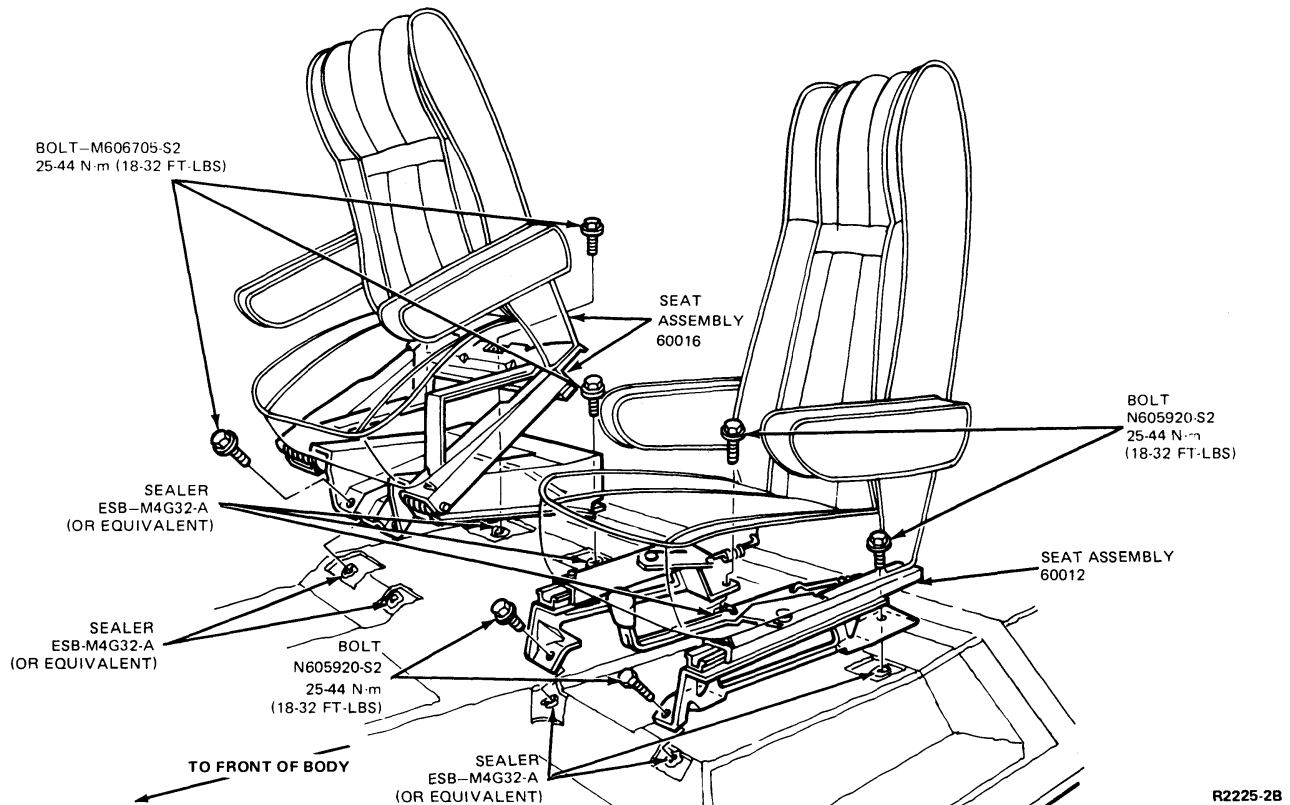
Bronco and F-100—F-350 Super Cab Captain's Chairs
